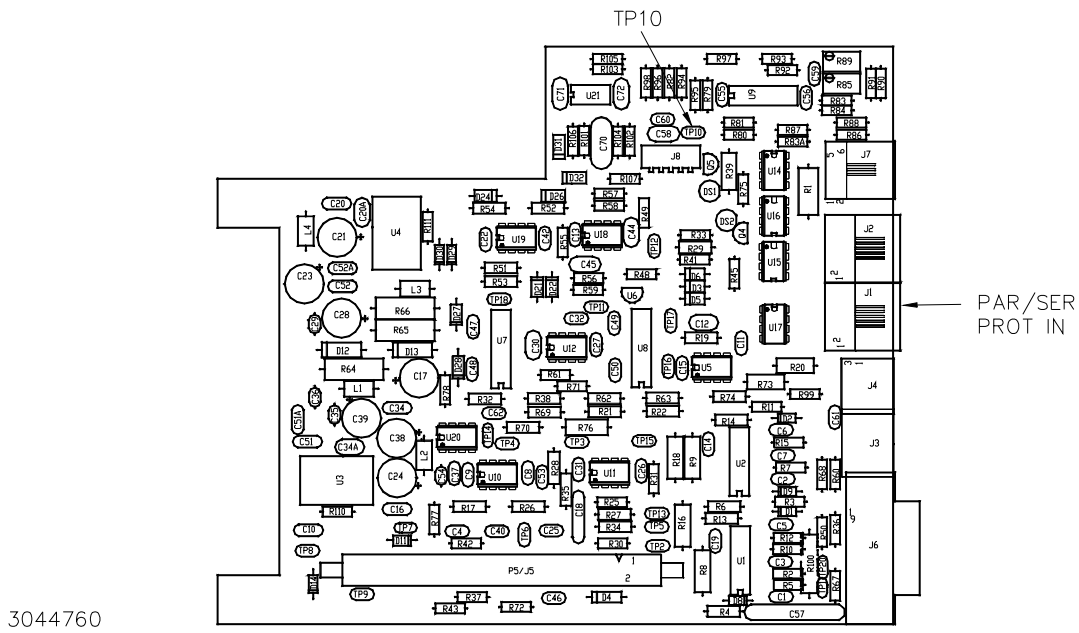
ASSEMBLY A2A5 COMPONENT LOCATIONS
